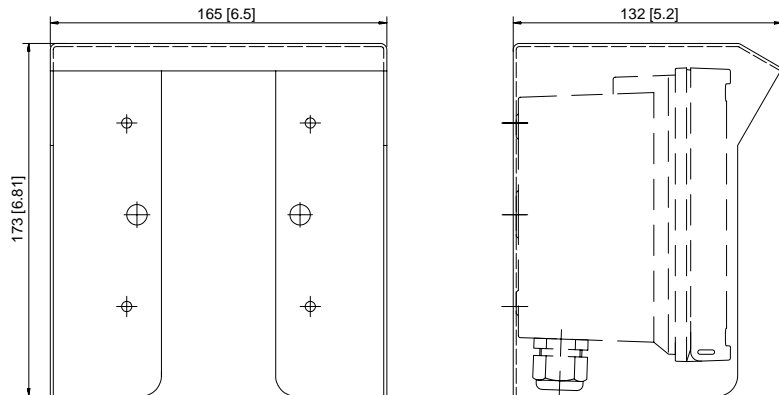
P/N 51205989-001 protective hood for wall and pipe mounting
